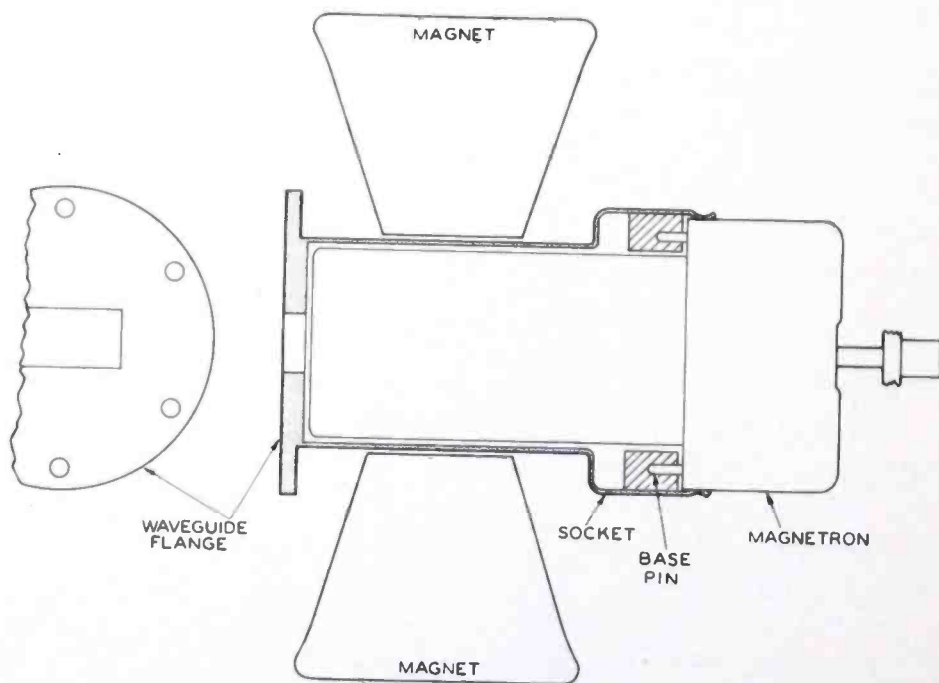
Plug-in-type socket for the magnetron. This socket is mounted with a permanent magnet in the equipment.
